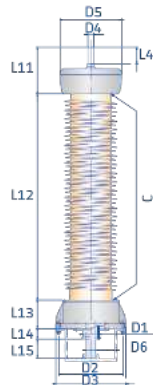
Bushings with composite housing 72.5 to 362 kV
